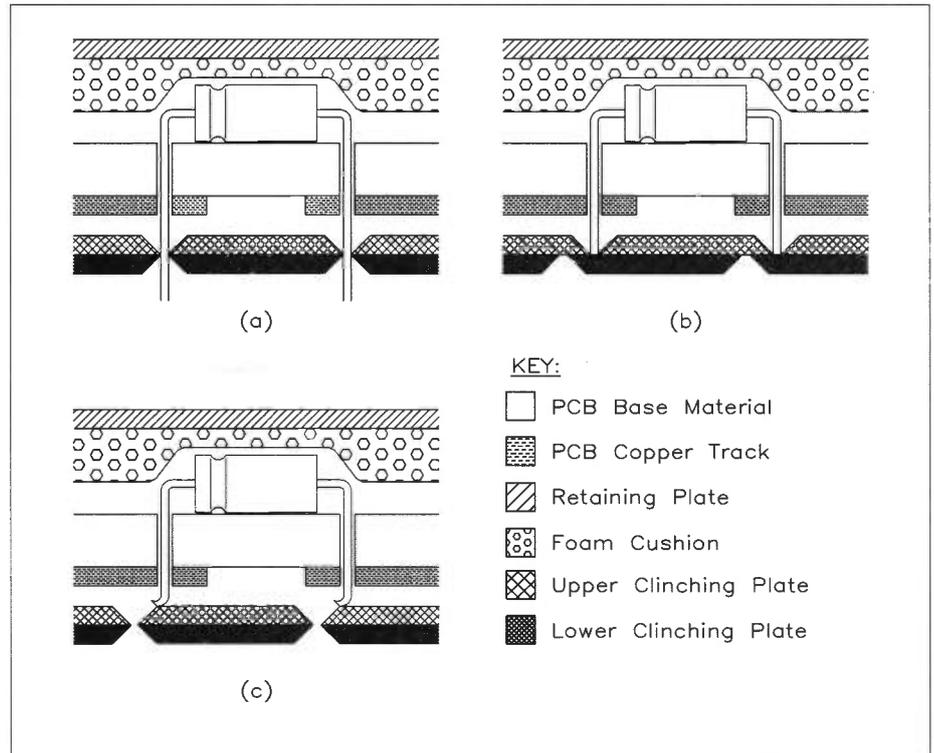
Mechanical clinching and cropping of component leads: (a) component is inserted; (b) lower clinching plate cuts off excess leads; (c) lower clinching plate clinches leads.
